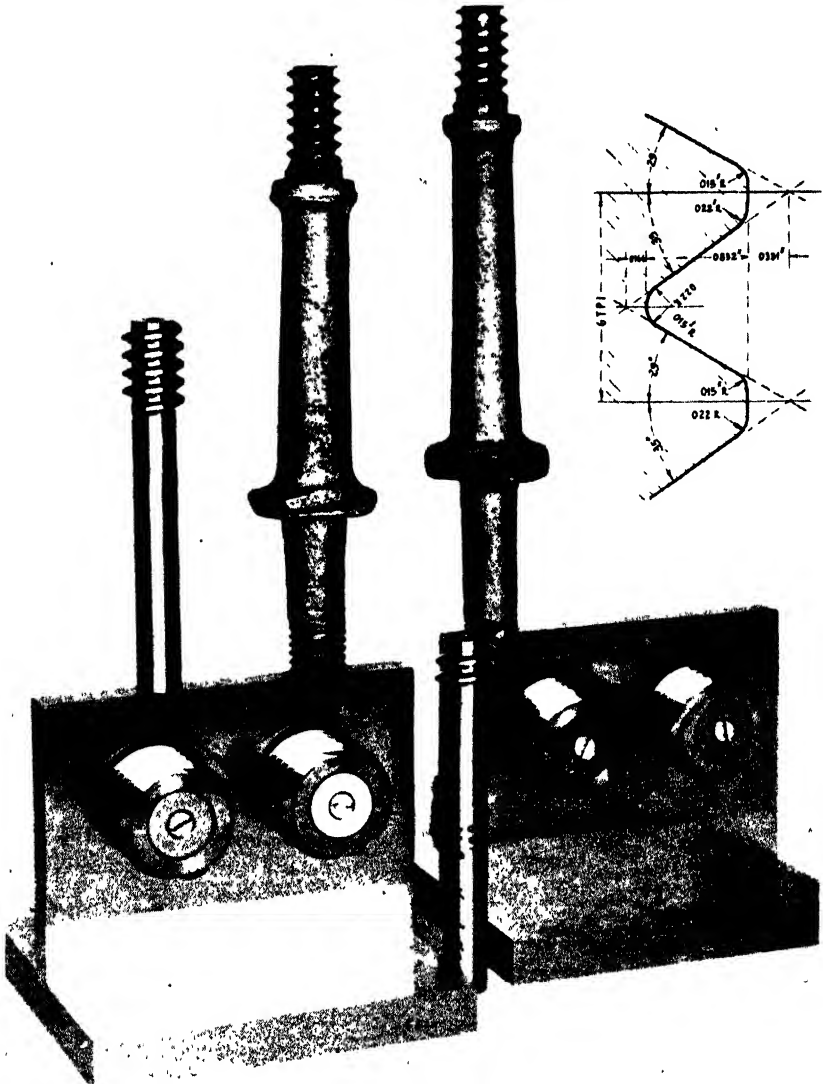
Roller-gauge for  $\frac{5}{8}$  in. insulator spindle, Cordeaux thread.
